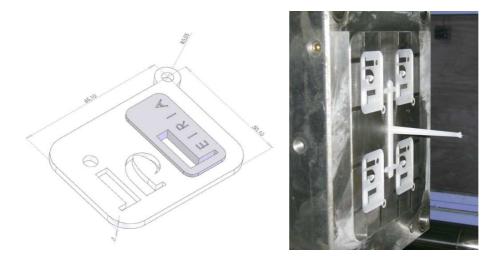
Key holders parts: a schematic view (left) and a view of the four injected parts in the mould (right).
